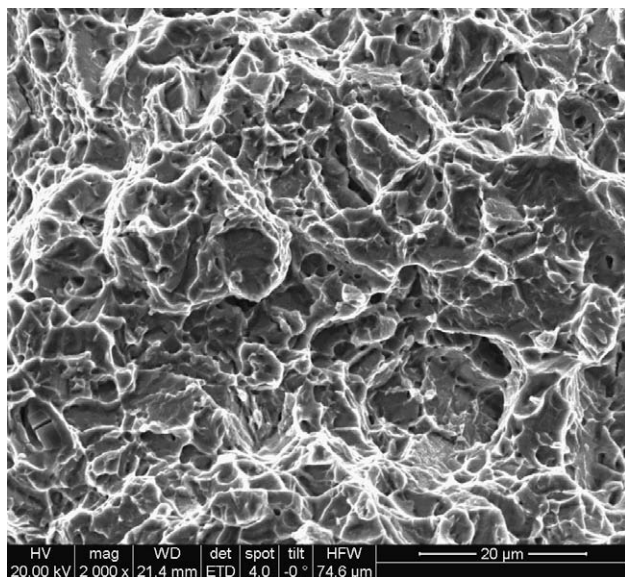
Typical high magnification view of the elliptical flat fracture surface of specimen No. 9.
